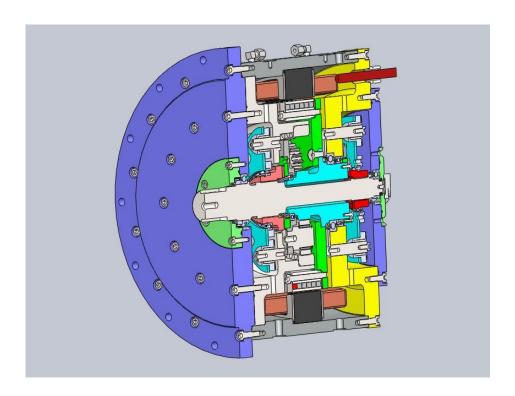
Section View of the Manufacturing 3D Model (Integrated Hub-Motor Drive Train for Off-Road Vehicles 2014)
